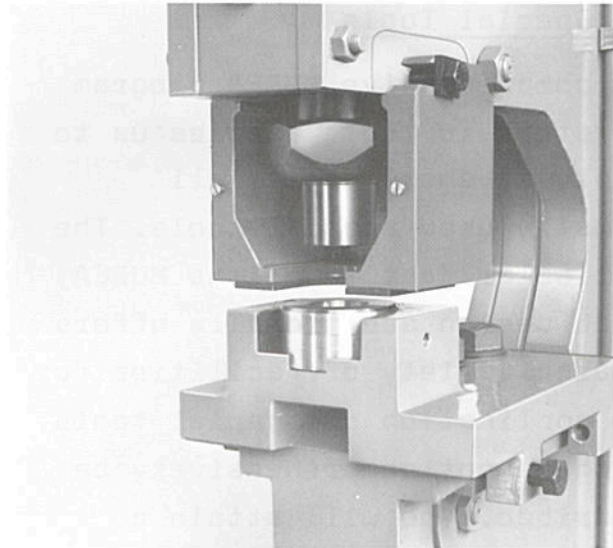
Special punch equipment for mounting of punches and dies up to 50 mm cutting diameter
